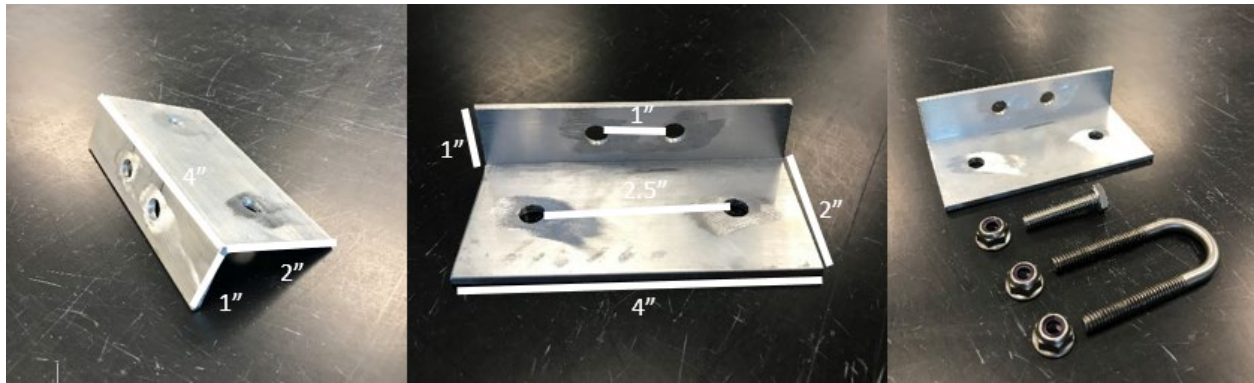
Aluminum angle bracket dimensions and associated mounting hardware for in-stream sensors.
